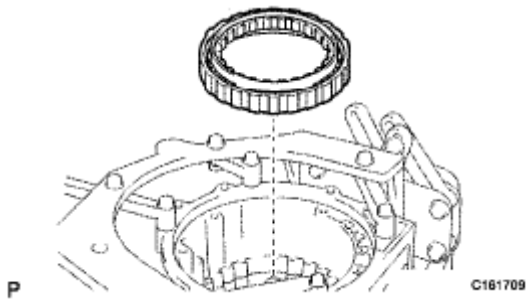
Identifying No. 3 Brake Cylinder With No. 3 Brake Piston
